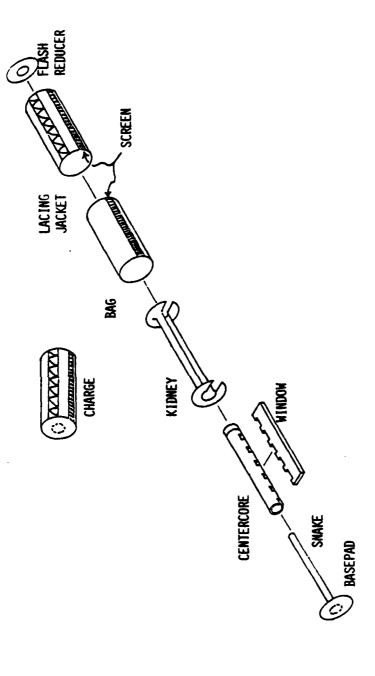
Exploded View - Windowed 155-mm, M203, Zone 8S Propelling Charge
